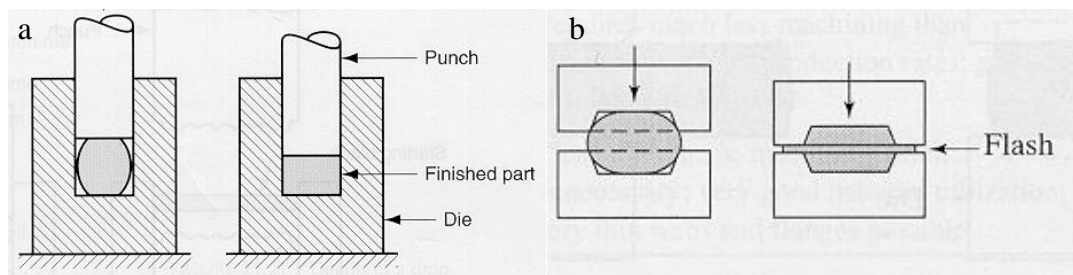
Closed die forging; a) closed die forging b) impression die forging [2]
